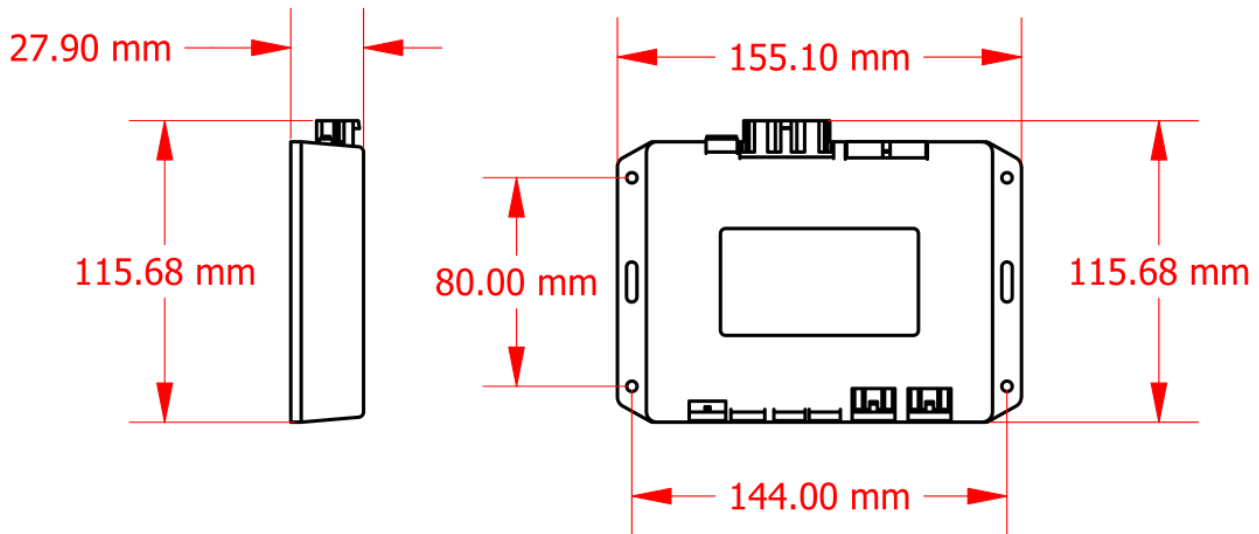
CAN-PCU5000 Power Control Unit Dimensions
